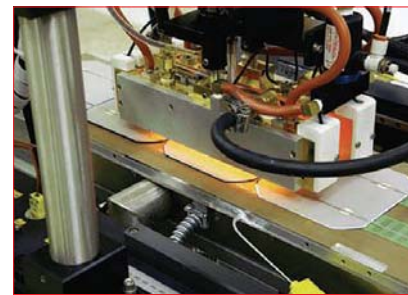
Spire offers single-step IR lamp soldering for both front- and back-cell contacts.
